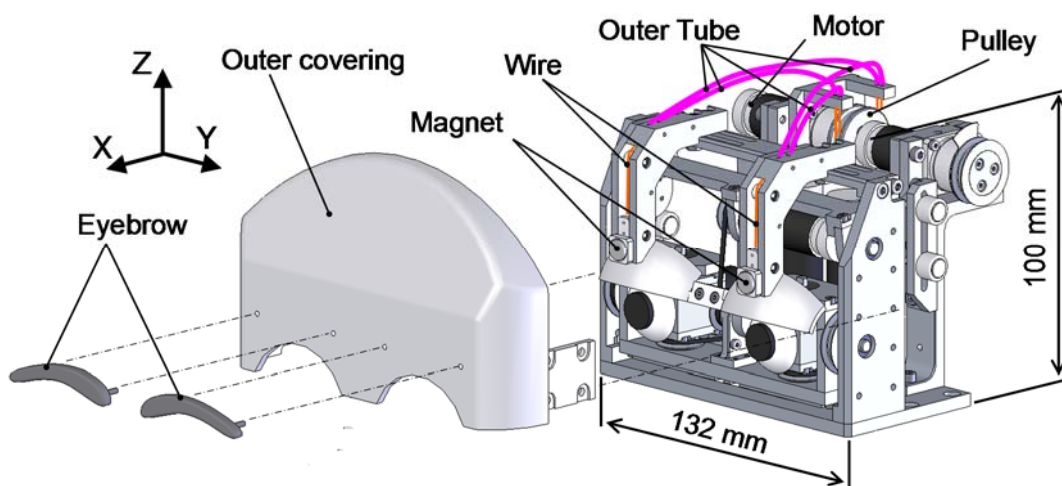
8 Exploded view of the eyebrow and the outer covering
